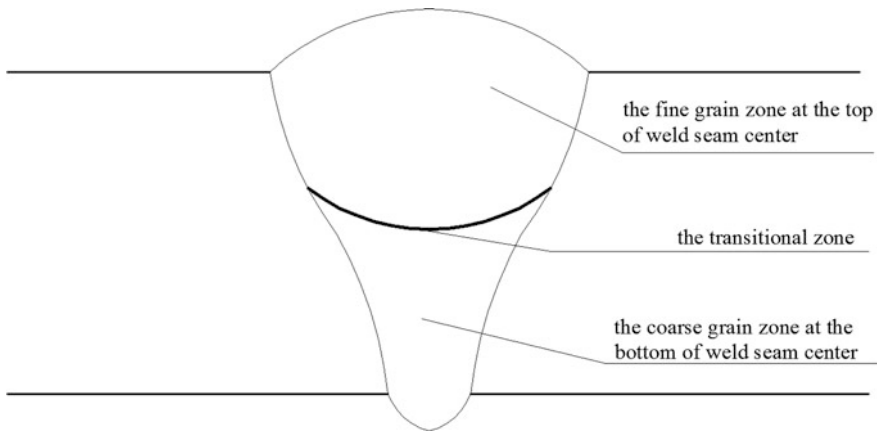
Dividing of welding bead in the hybrid weld
